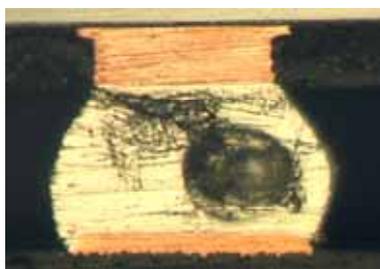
the relationship between fatigue life of solder joints and the position and size of the void in solder joints
